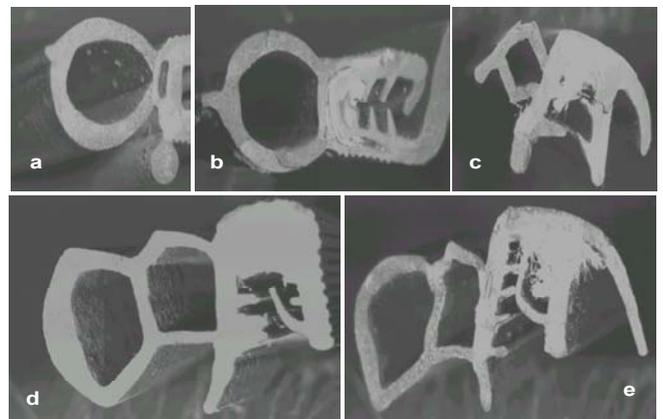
Examples of single-bulb gasket sections (a,b,c) and two-bulb gasket sections (d, e).
